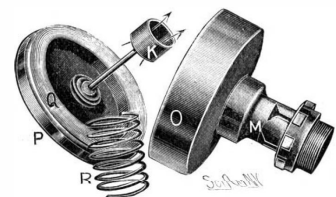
DETAILS OF THE AUXILIARY AIR VALVE AND ITS DIAPHRAGM.
